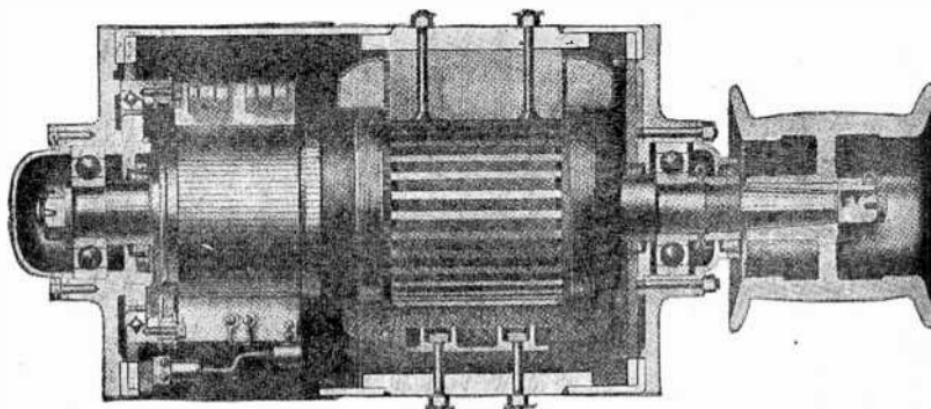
,459.—Safety C. H. & L. dynamo; sectional view showing construction.
